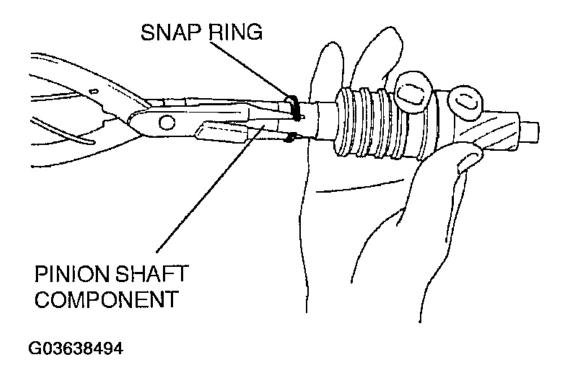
Removing Snap Ring Without Damaging Pinion Shaft Component Courtesy of MAZDA MOTORS CORP.
